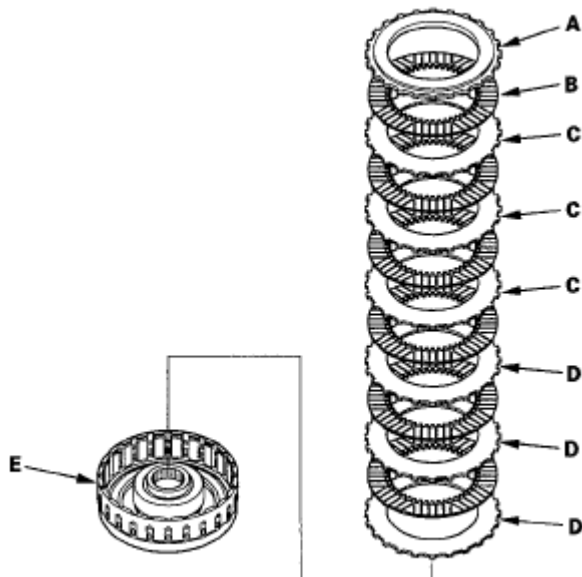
Identifying Clutch End Plate, Clutch Discs, Clutch Wave-Plates And Clutch Flat-Plates
